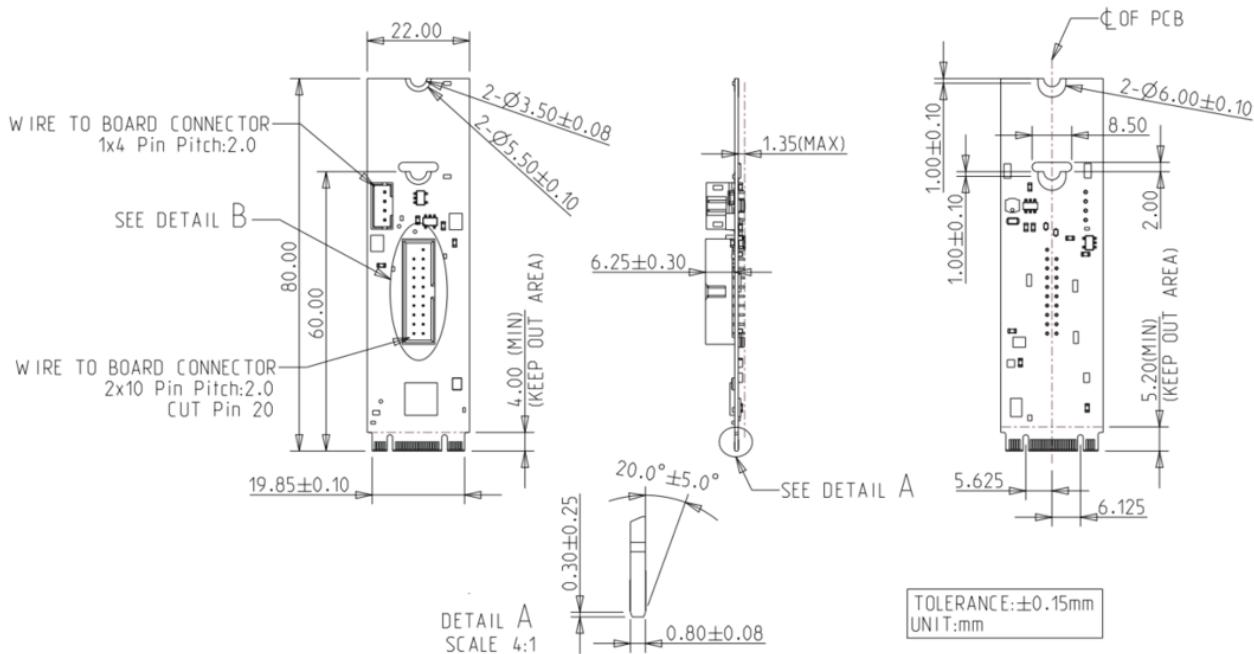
EGPU-3201 M.2 B-M Key Board Drawing
